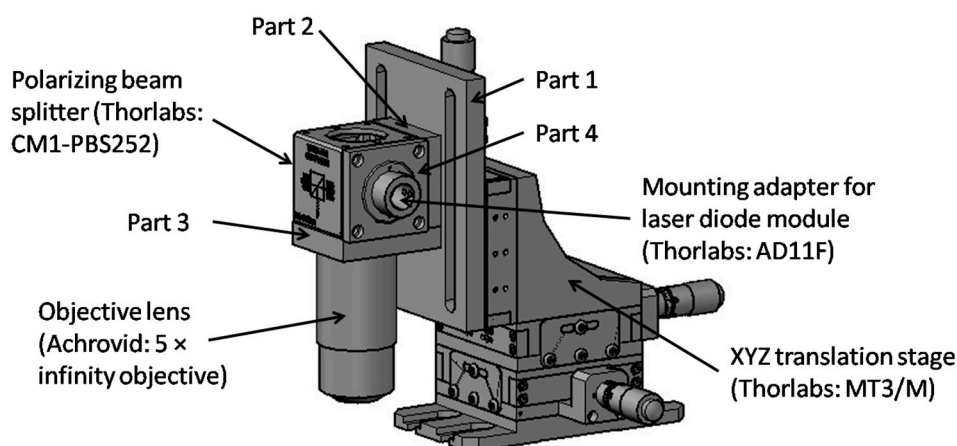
The assembly detail for the section consisting of a laser diode module, polarizing beam splitter and objective lens. Custom part 1, part 2, part 3, and part 4 are used in this section. Part 1 is attached to the MT3/M translation stage and the height can be adjusted to accommodate different objective lens with various working distances. After part 1 and subsequent parts are fixed, fine-adjustment is accomplished by using the micrometers of the translation stage (X, Y and Z-axes) to focus the laser spot onto the AFM cantilever. A laser diode module (applicable only to housing size with 11 mm diameter) is fixed through the mounting adapter which is attached to part 4.
